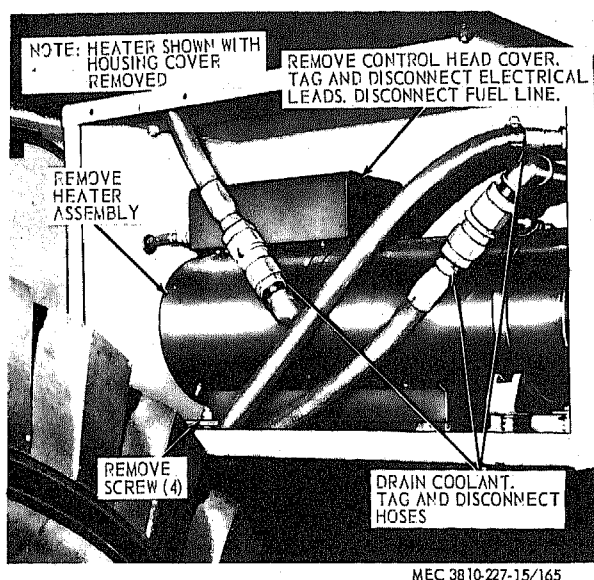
Carrier engine liquid heater assembly, removal and installation.
